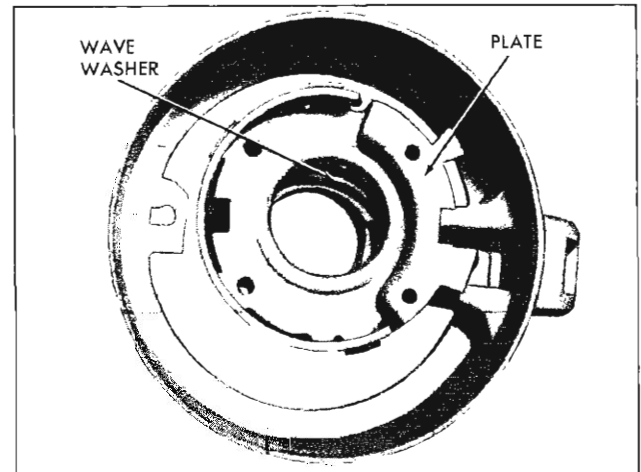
Lock Plate, Wave Washer and Shift Lever Support Housing
